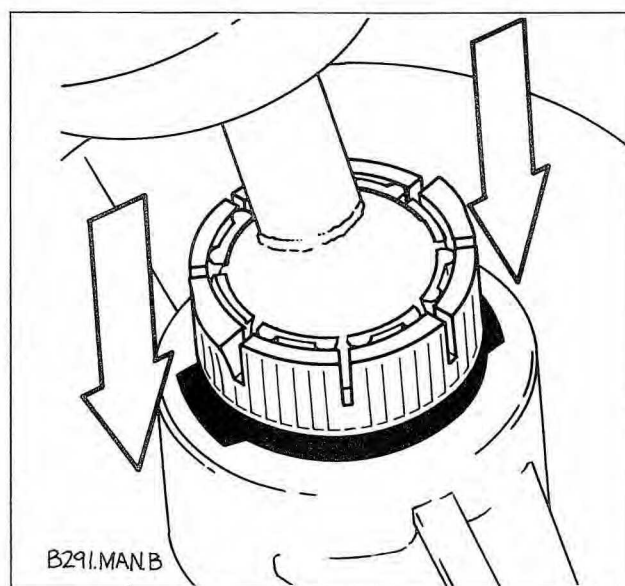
Shift rod bushing lockring (arrow), and pin (A). Transmission shown removed. With transmission installed, drive pin out from below.
